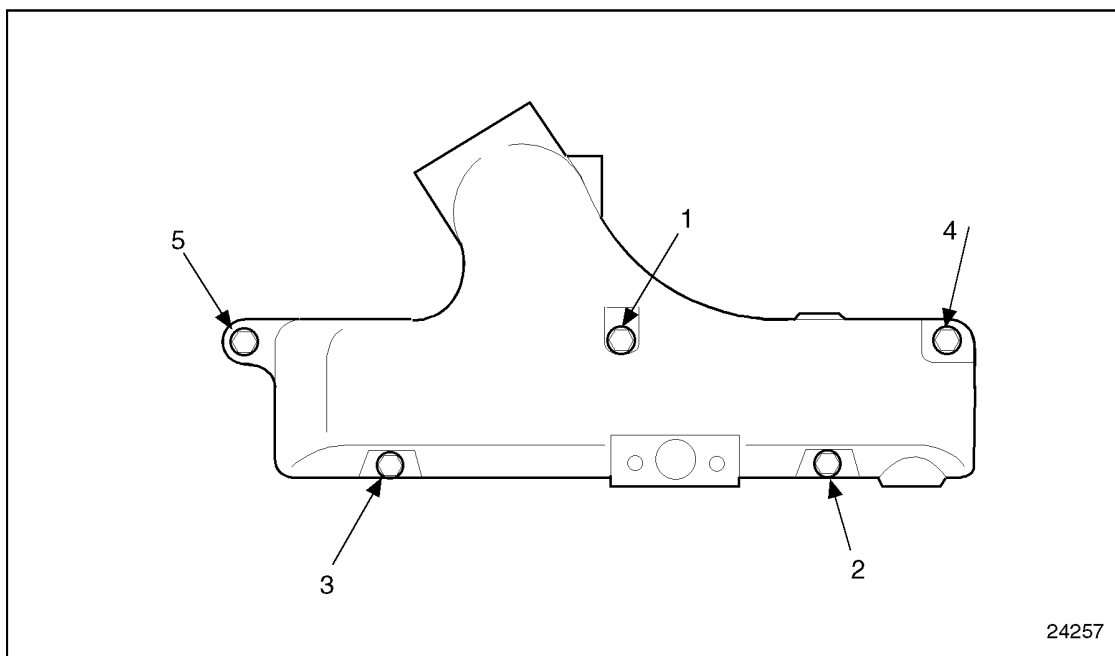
Intake Manifold Bolt Tightening Sequence
